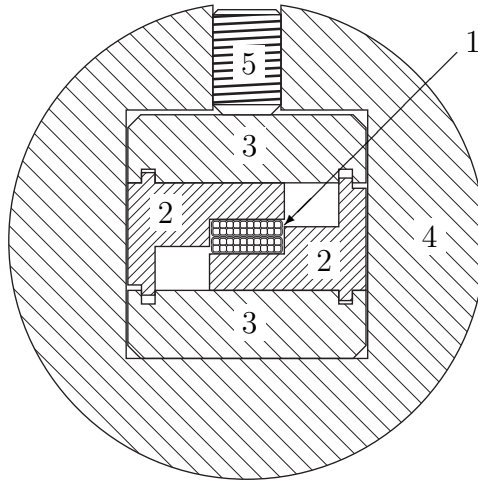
The sample (1) is placed between two glass fiber reinforced filler pieces (2), which are bolted to a stainless steel blade (3). The blades are compressed in the collar (4) by a bolt (5).
